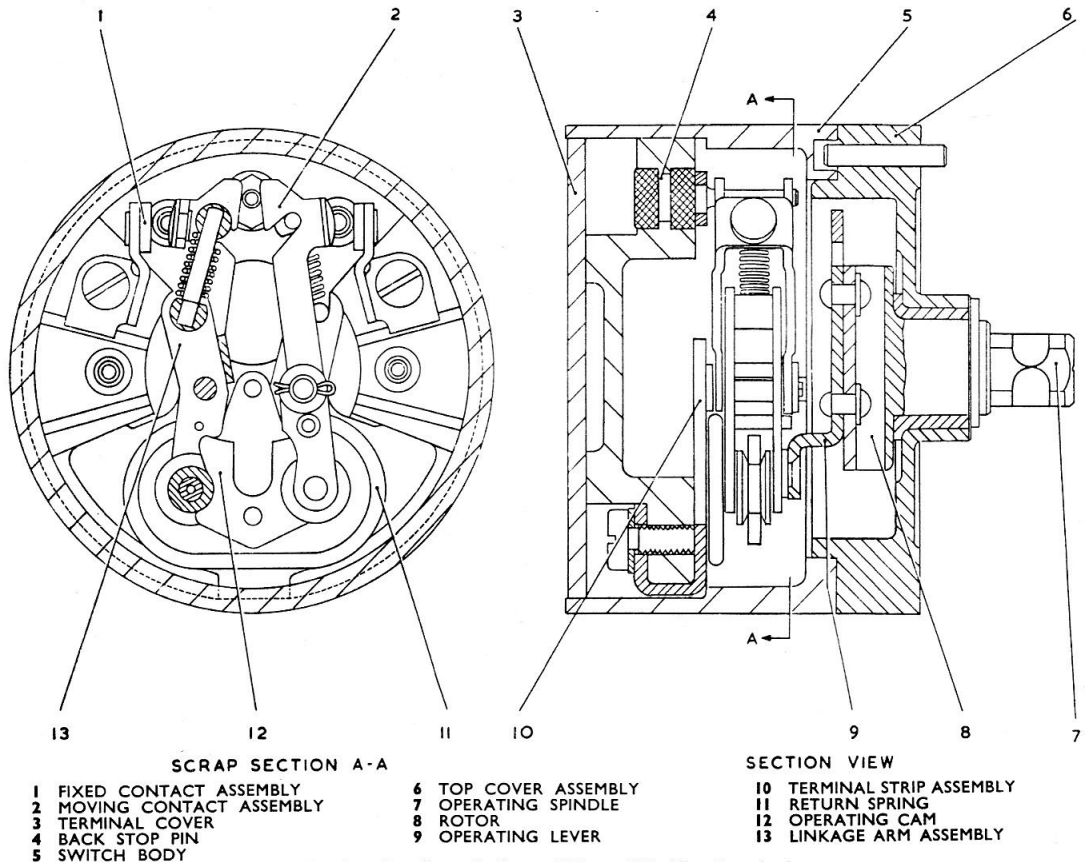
Sectioned view of Type 2B, No. 1 switch
